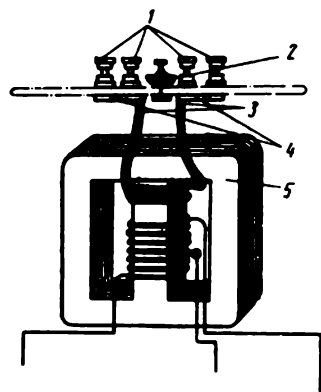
Wiring diagram of electric resistance unit for soldering band-saw blades:
